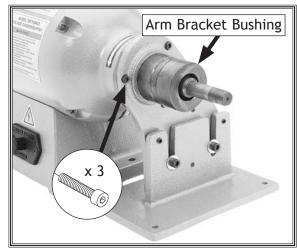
Pivot arm bracket assembly installed onto the motor assembly.
